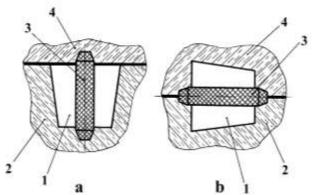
Possible location of the casting in the mould: vertical (a) and horizontal (b) positions; 1 – mould cavity (casting); 2 – lower half-mould; 3 – core; 4 – upper half-mould
